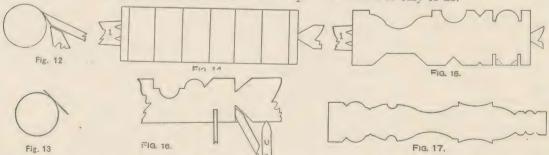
Sectional detail showing gouge, rest and wood Fig. 13—Angle of chisel on wood Fig. 14—Wood in lathe, set out for shaping
